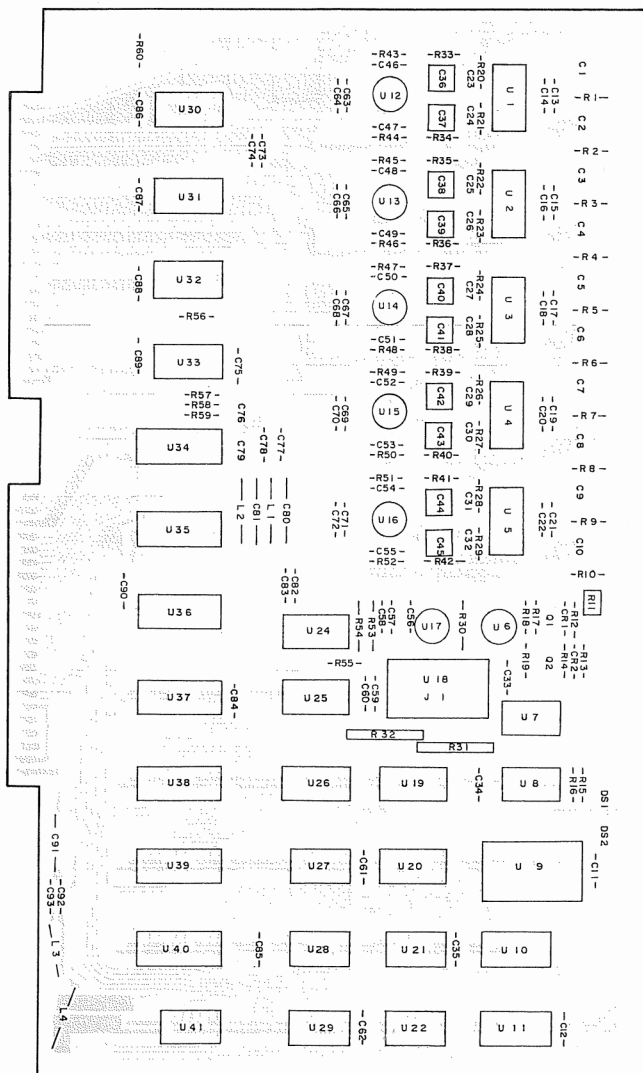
A4 D-A Converter Board Assembly Component Locations.
